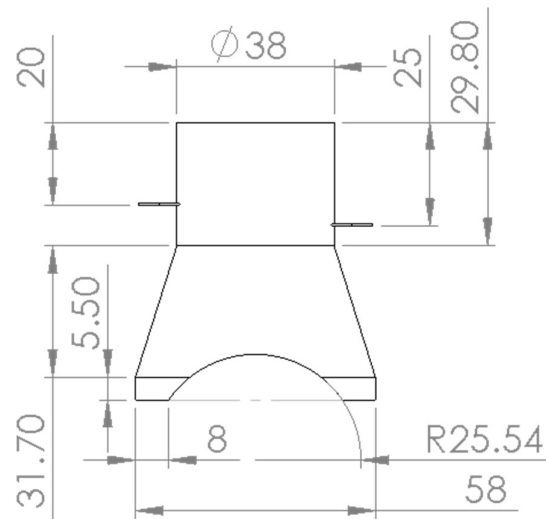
Detailed dimensions of transducer T43 machined to fit on pipe of external radius of 25.54mm.
